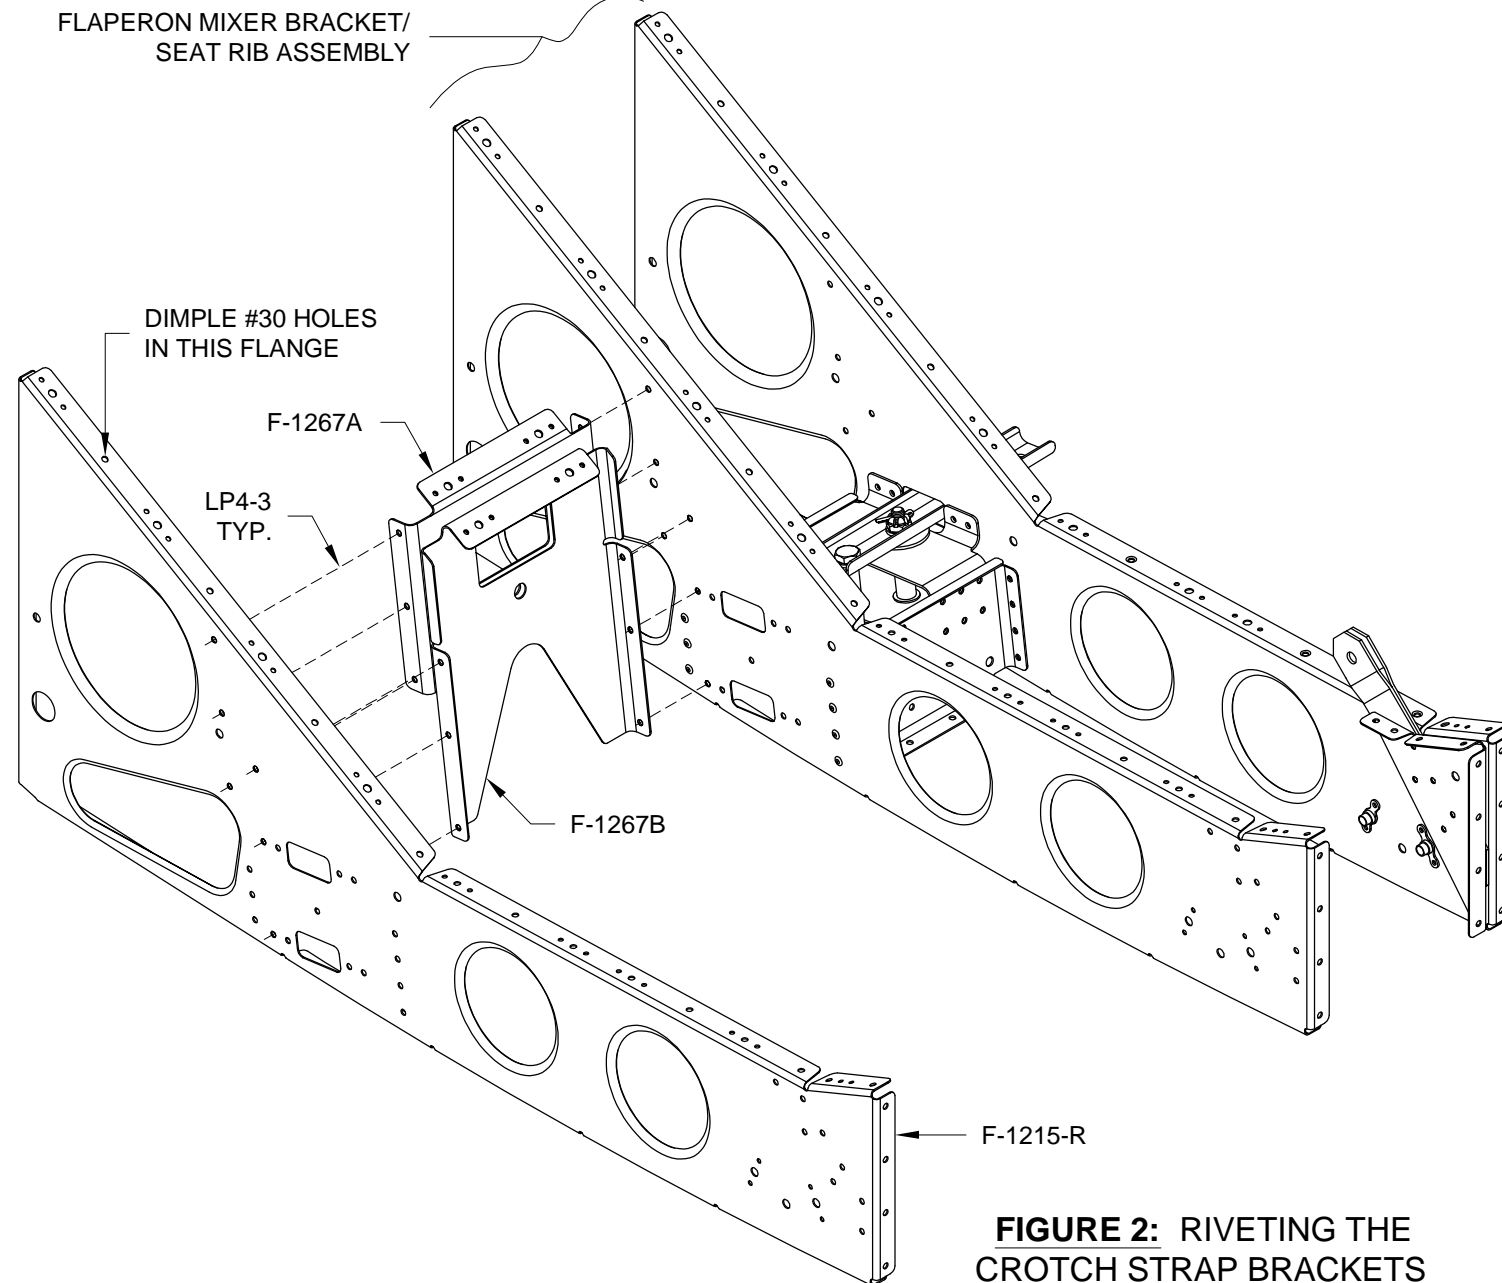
RIVETING THE CROTCH STRAP BRACKETS
